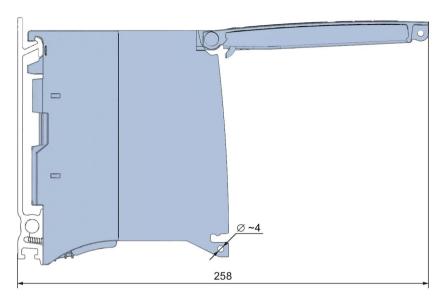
Dimensional drawing CPU 1516-3 PN/DP, side view with open front cover
